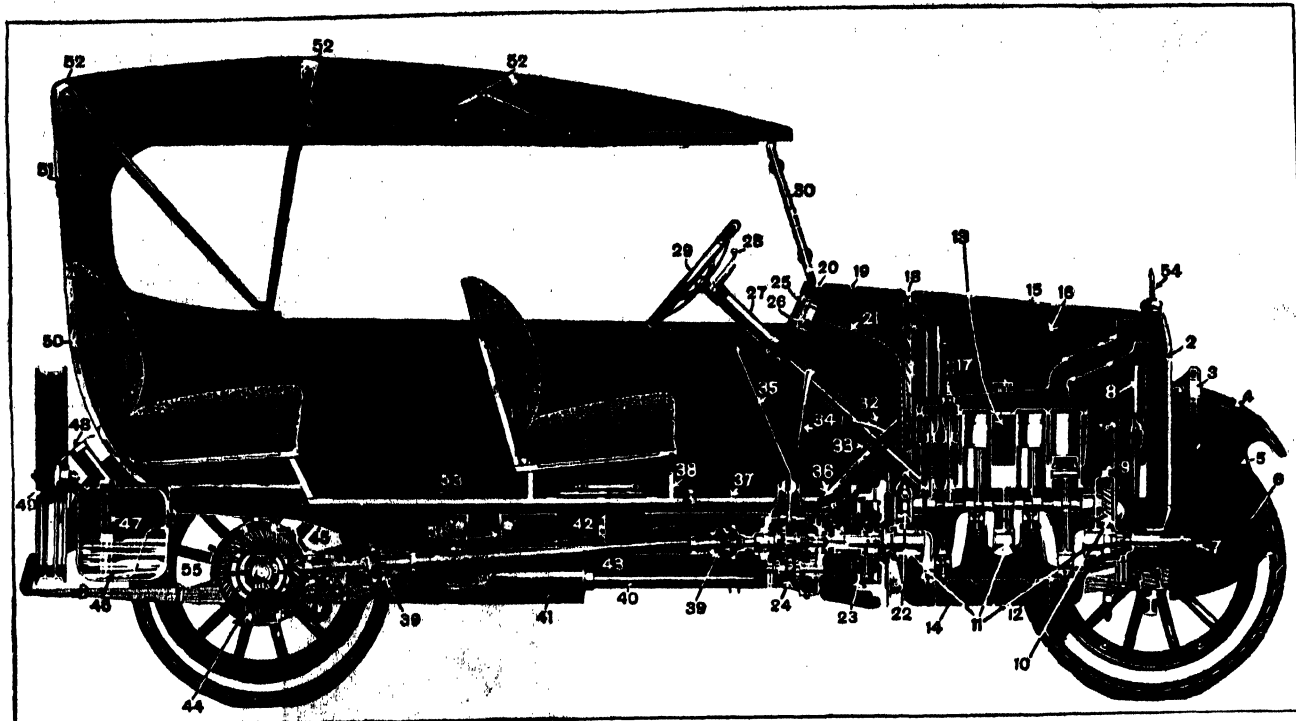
Central longitudinal section of typical American four-cylinder passenger car of 1920 (Allen). (1)—Engine cylinder head; (2)—Radiator; (3)—Headlight; (4)—Mud-guard; (5)—Filler plate; (6)—Splash plate; (7)—Engine starting shaft; (8)—Fan; (9)—Fan belt; (10)—Camshaft gear; (11)—Crankshaft main bearings; (12)—Oil pan; (13)—Engine water jacket; (14)—Camshaft; (15)—Hood; (16)—Radiator stay-rod; (17)—Vacuum tank; (18)—Dashboard; (19)—Cowl; (20)—Instrument board; (21)—Speedometer drive; (22)—Oil circulating pump; (23)—Friction clutch; (24)—Change-speed gear; (25)—Dash lamp; (26)—Speedometer; (27)—Steering post; (28)—Spark and throttle levers; (29)—Steering wheel; (30)—Wind-screen; (31)—Steering-post bracket; (32)—Brake pedal (on left of steering post), Clutch pedal (on right of steering post); (33)—Accelerator pedal; (34)—Emergency brake lever; (35)—Gear lever; (36)—Toe-board; (37)—Foot-board; (38)—Knee-board; (39)—Universal joints; (40)—Exhaust pipe; (41)—Silencer; (42)—Storage battery; (43)—Propeller shaft; (44)—Spiral bevel crown gear; (45)—Frame; (46)—Fuel tank; (47)—Fuel tank gauge; (48)—Fuel tank filler; (49)—Spare rim; (50)—Body; (51)—Rear window; (52)—Hood bows; (53)—Foot-rail; (54)—Radiator thermometer; (55)—Brake; (56)—Brake equalizer shafts.
